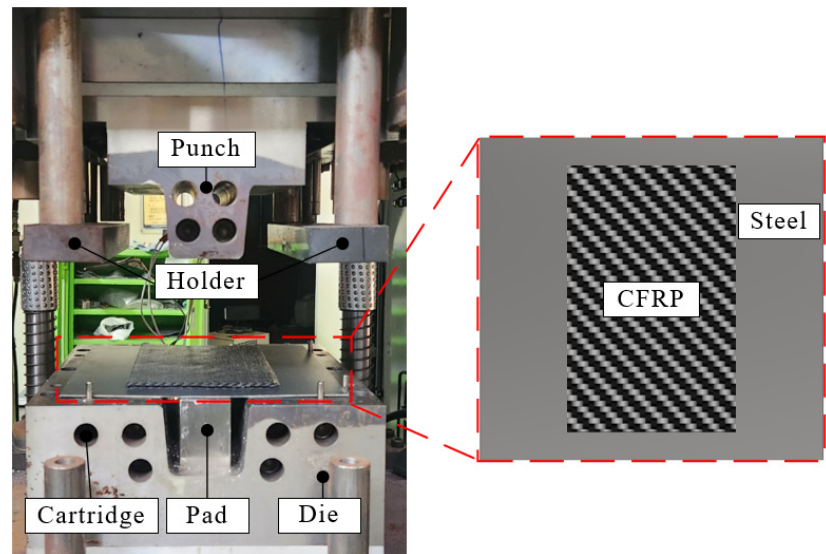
Experimental equipment to manufacture the steel/CFRP hybrid part.
